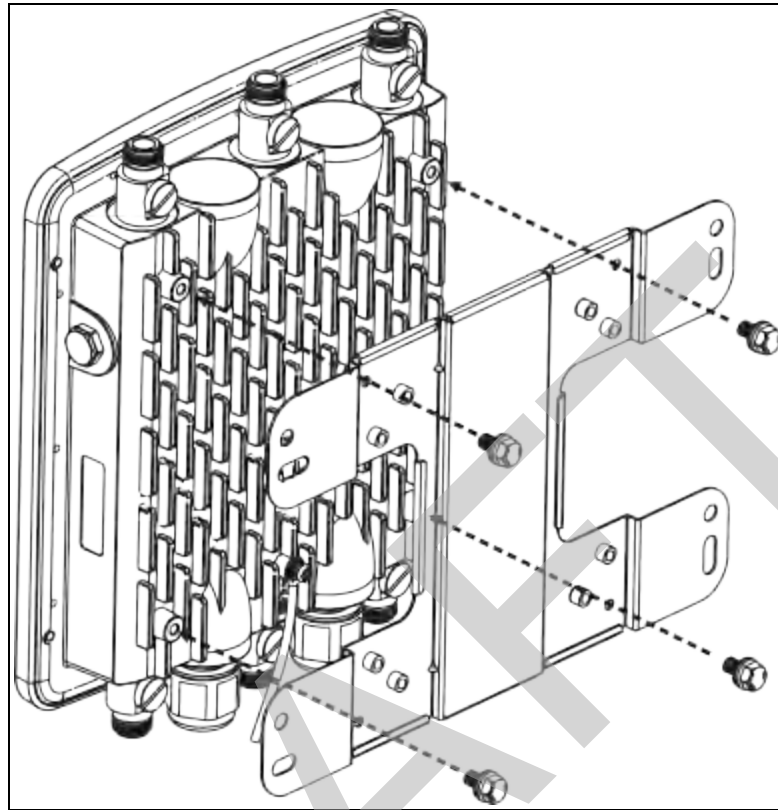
Insert and tighten the screws to attach the Mounting Bracket
